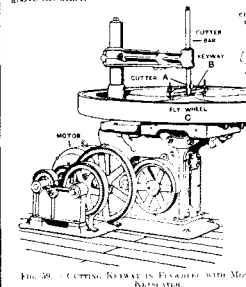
CUTTING KEYWAY IN FLANGE WITH MOTOR DRIVEN VICE.
